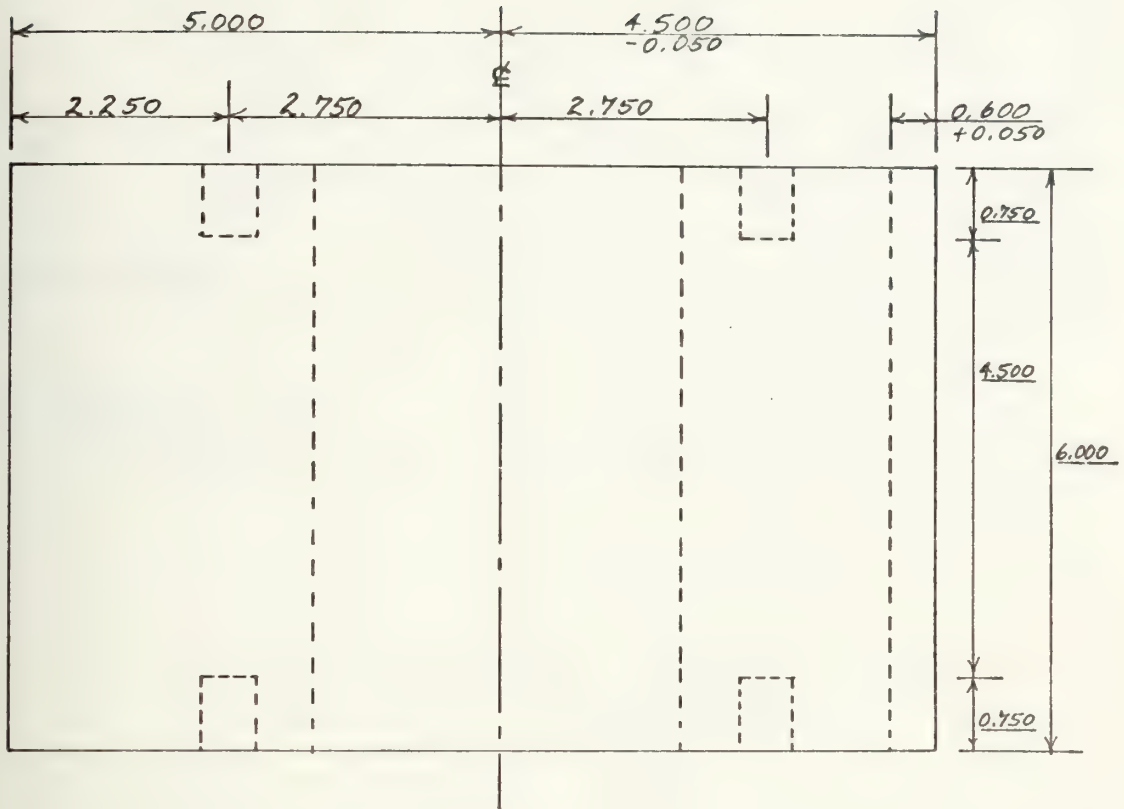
PIECE I-3, INSTRUMENT MOUNT BLOCK
